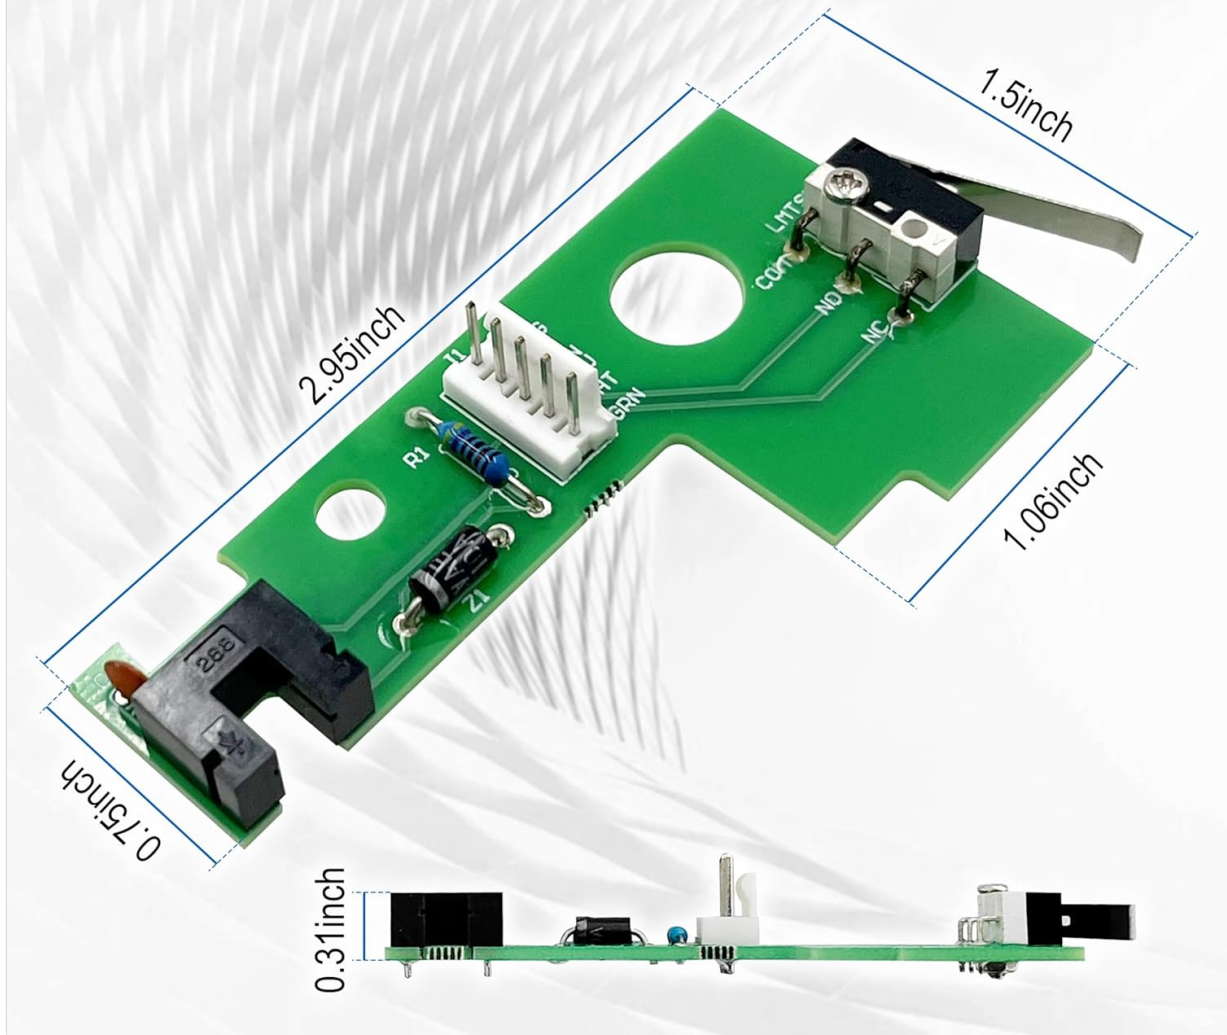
Diagram illustrating the physical dimensions of the Rev Counter Board.
